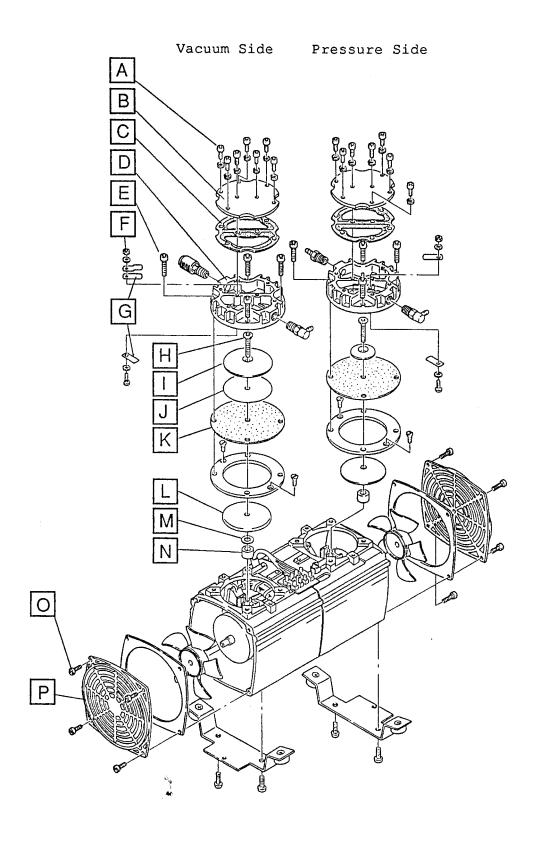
KNF Compressor Disassembly Drawing
